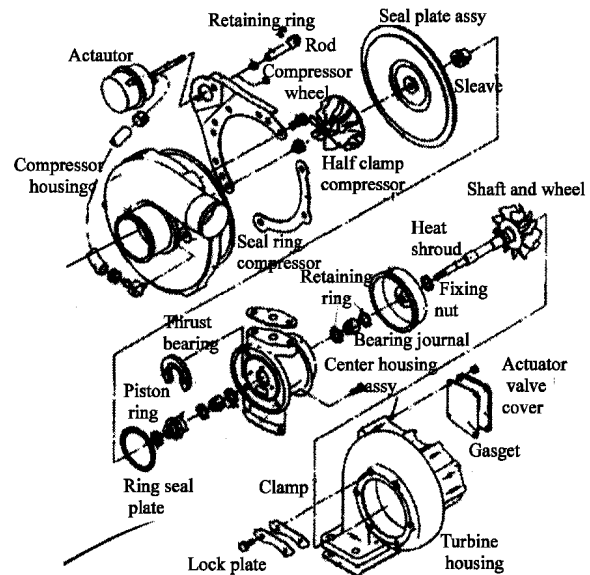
Exploded view of an MTU 12V 396 TC 32 turbocharger
